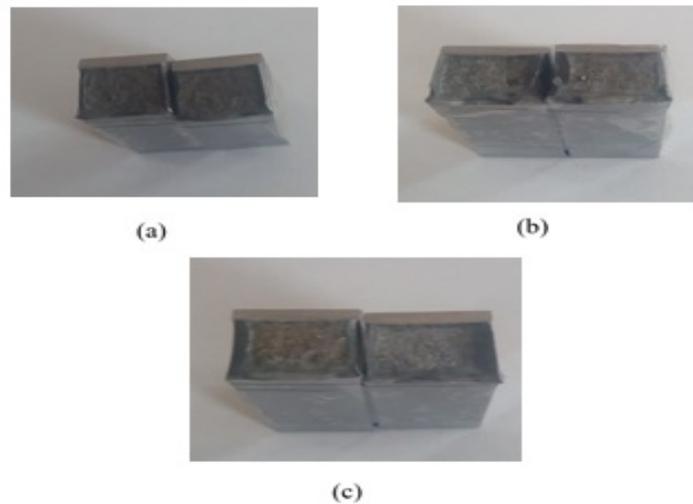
The fracture surfaces of the samples after impact test welded with (a) 6356, (b) 6357, and (c) 6360 coded electrode.
